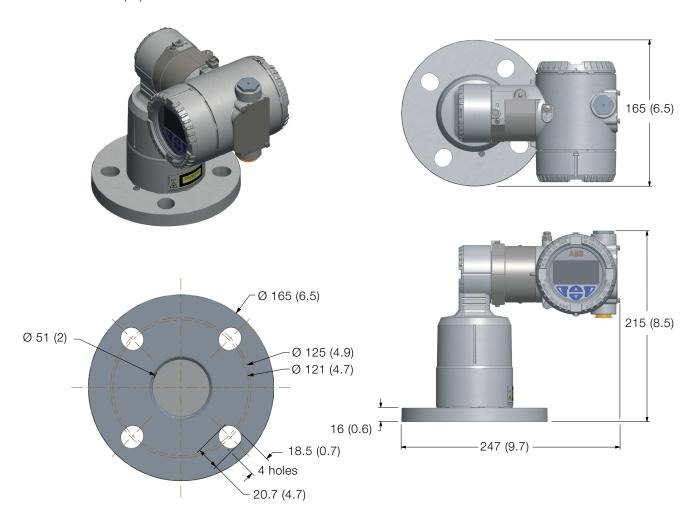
LLT100 with universal flange (aluminum and stainless steel)
